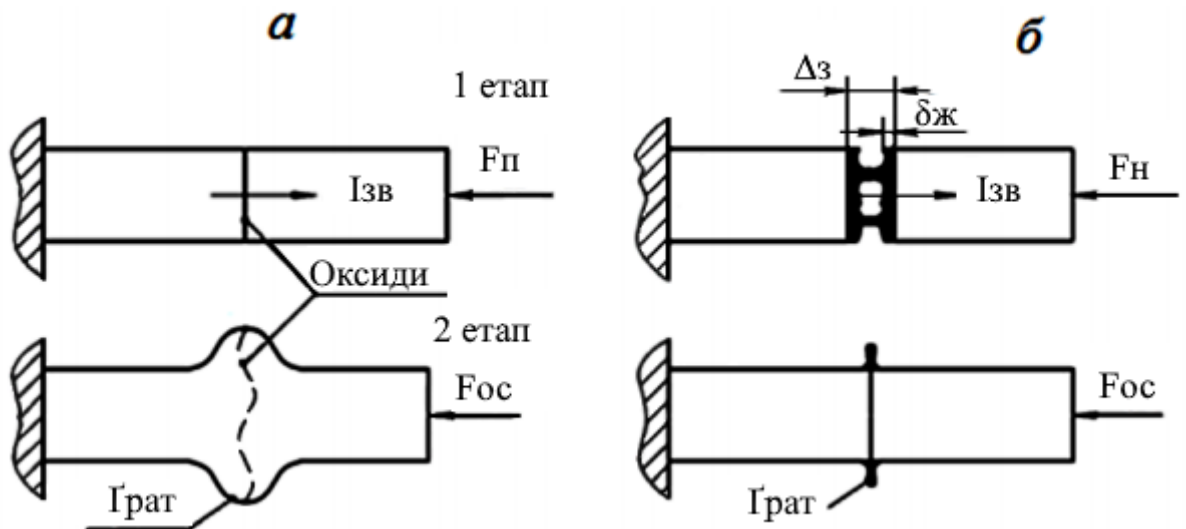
Stages of joint formation during butt welding:
